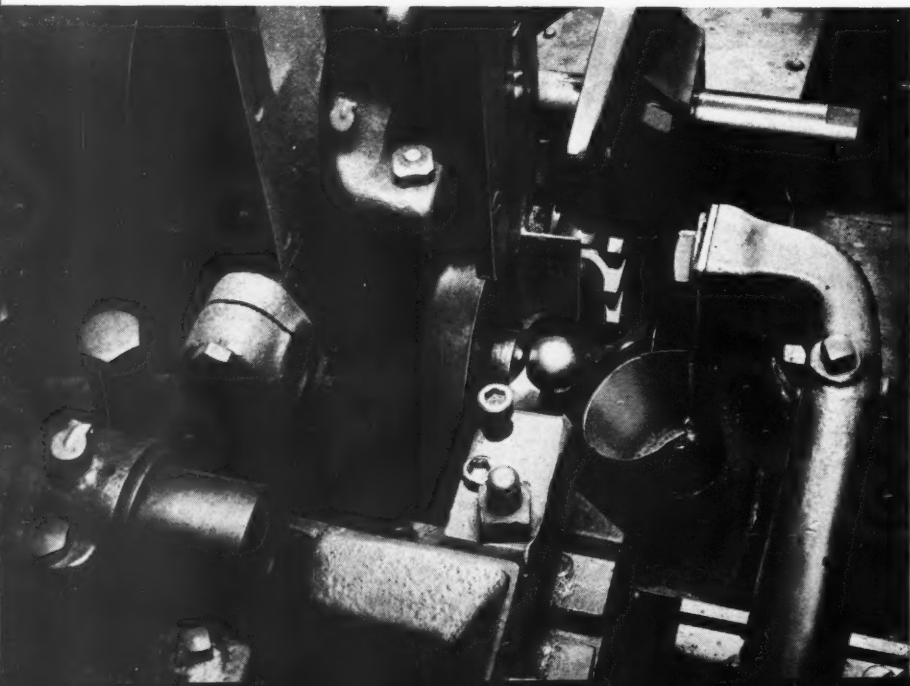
As the operation on the graphite ball nears completion, the upper and rear tools of the automatic screw machine are withdrawn from the work while the parting tool finishes its stroke
